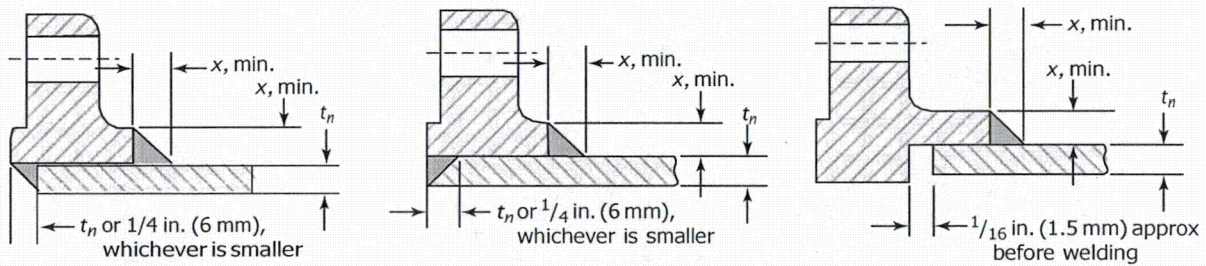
FILLET AND SOCKET WELD DETAILS AND DIMENSIONS
